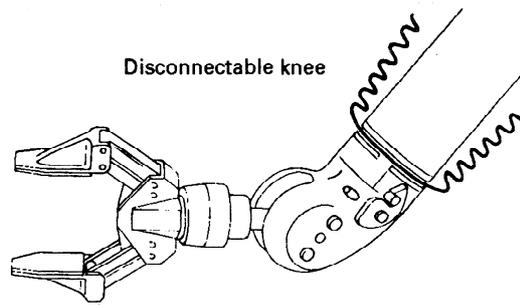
Gaiter ensuring protection of manipulator, with removable tong at the wrist
